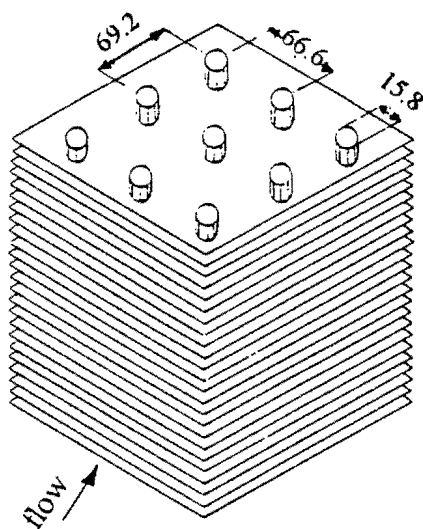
Isometric of straight fin-and-tube heat exchanger.
